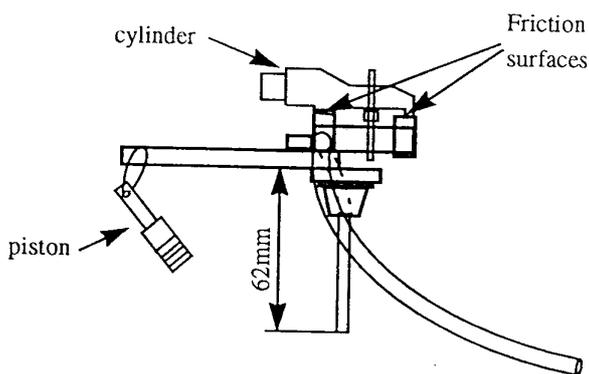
Pump and air-inlet device with removed piston and motor (not shown)
